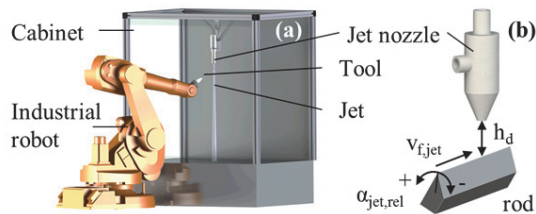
(a) Wet abrasive jet machining with industrial robot; (b) cutting edge handling parameters for the robot guidance.
